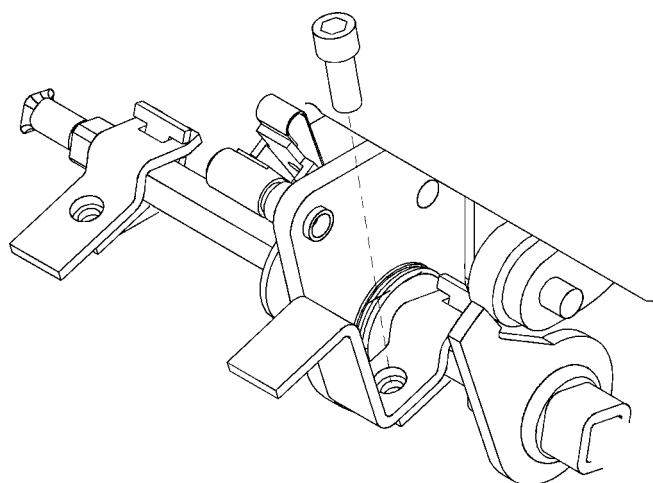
Mounting the trip paddle on the breaker's trip shaft.
